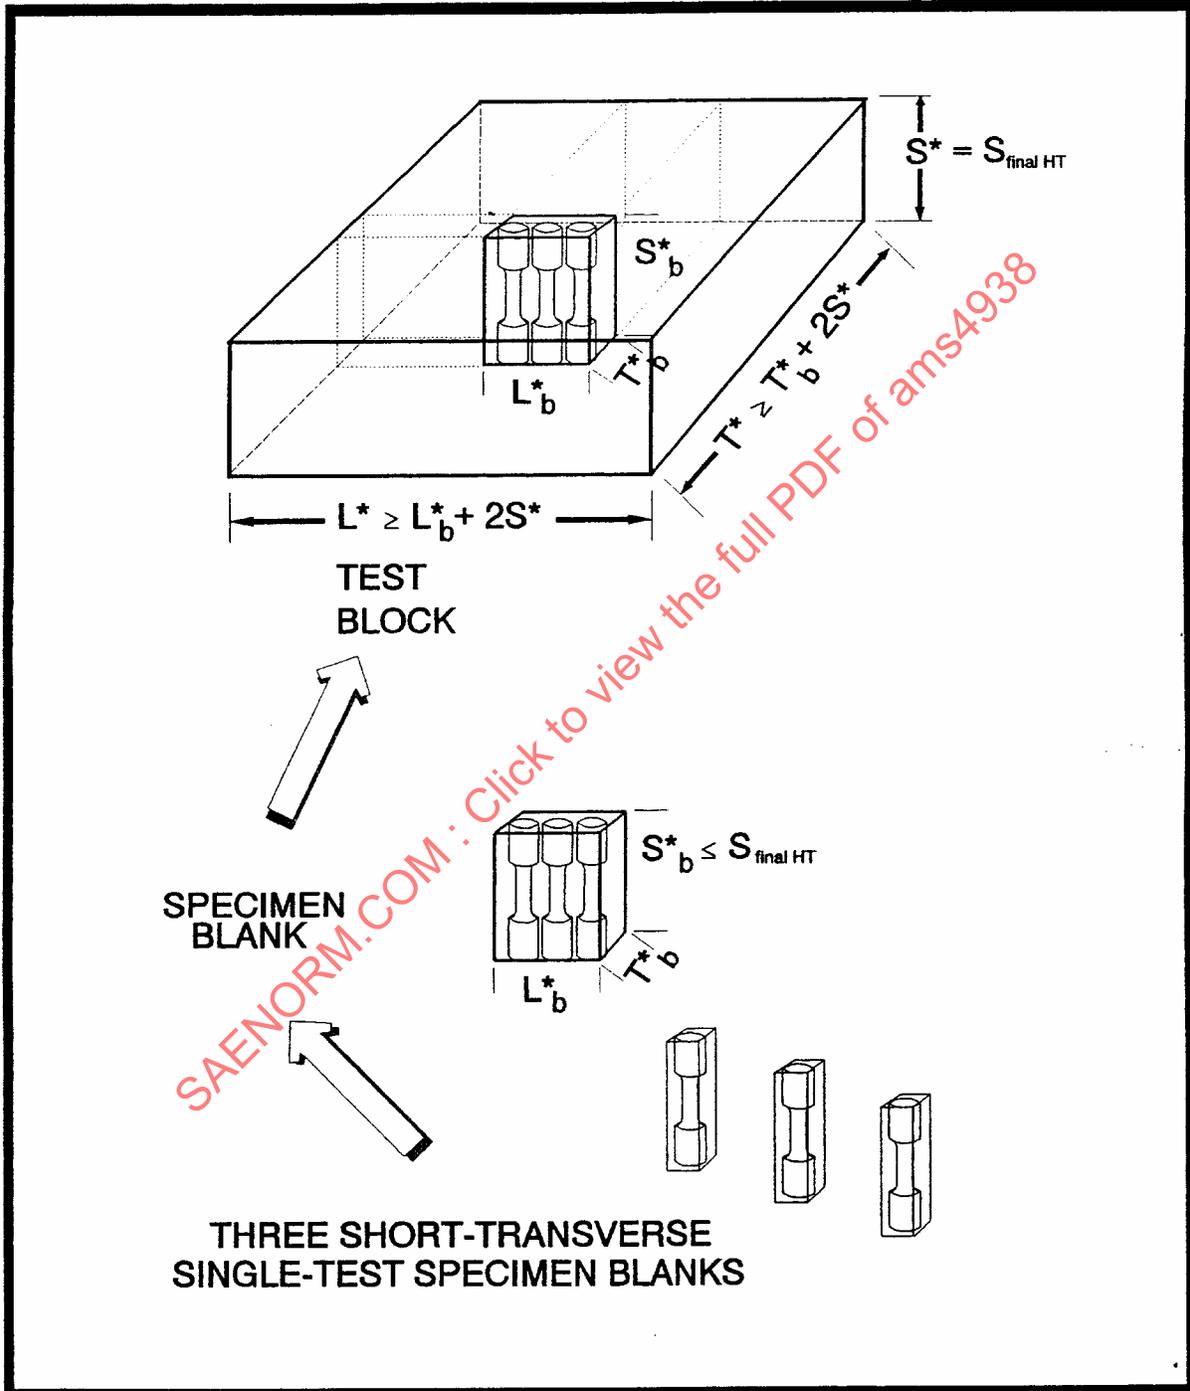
Short-Transverse Specimen Blank Design and Test Block Design
